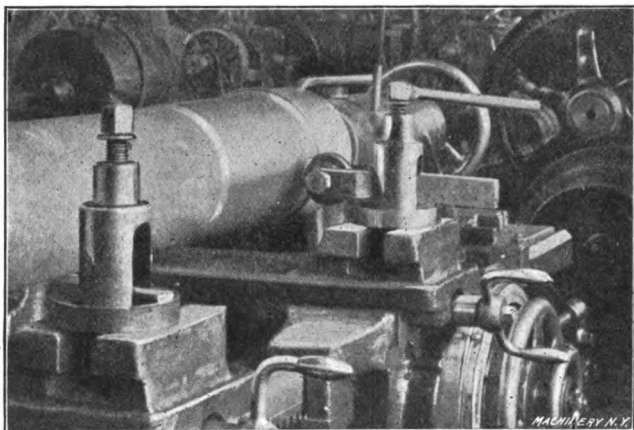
Finishing the Axle Journals with the Rolling Tool
